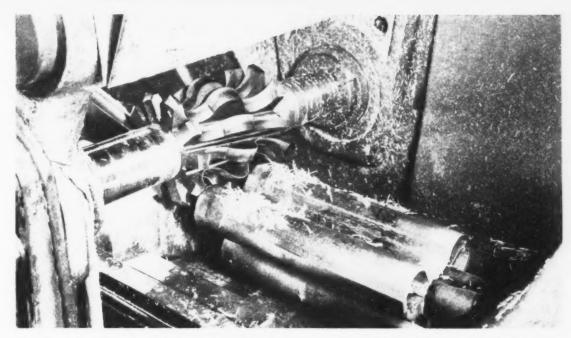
Rough milling of cast aluminum rotor lobes is done with a formed fluted cutter. The work is held in an air clamping fixture and fed from the underside. Cutter, of high speed steel, turns at 183 rpm to rough mill arc.
